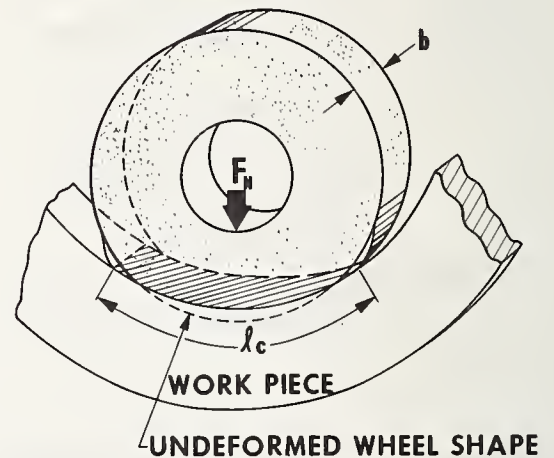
Grinding wheel deformation in an internal workpiece showing nomenclature (schematic).
